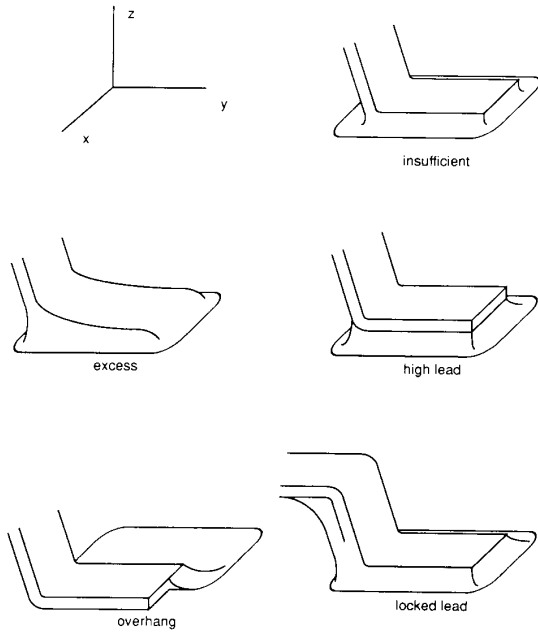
Some common defects associated with solder joints of surface-mounted components.
